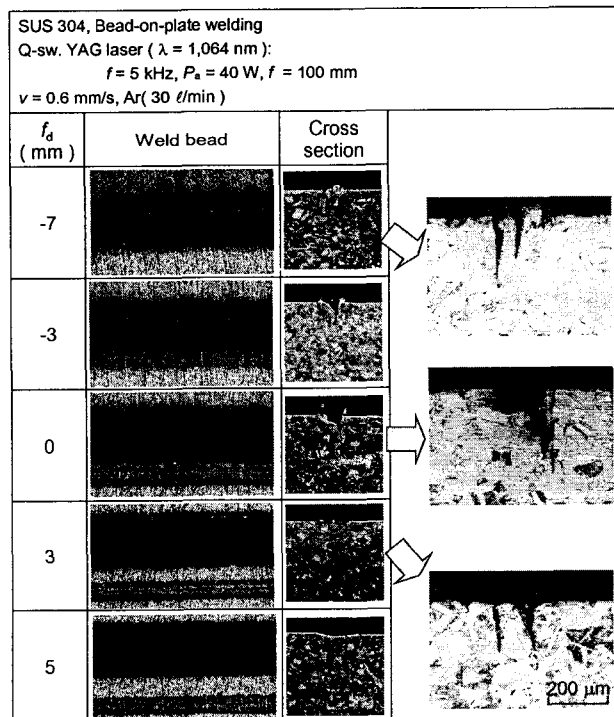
Penetration shapes and weld beads of SUS 304 with Q switched YAG laser.
